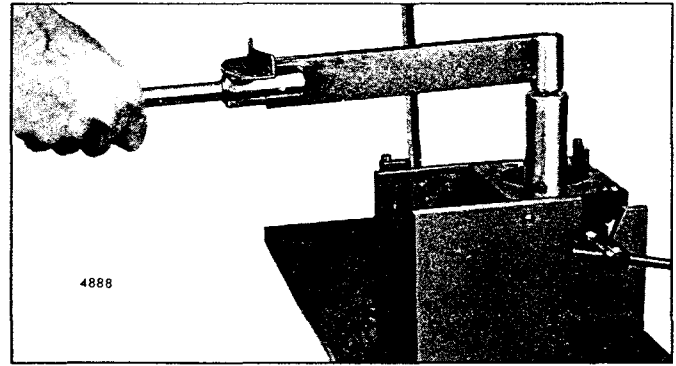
Tightening Injector Nut with Torque Wrench Using Tool J 4983-01
